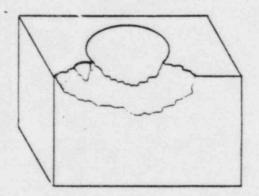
CRACKED TYPE AN PISTON SKIRT
